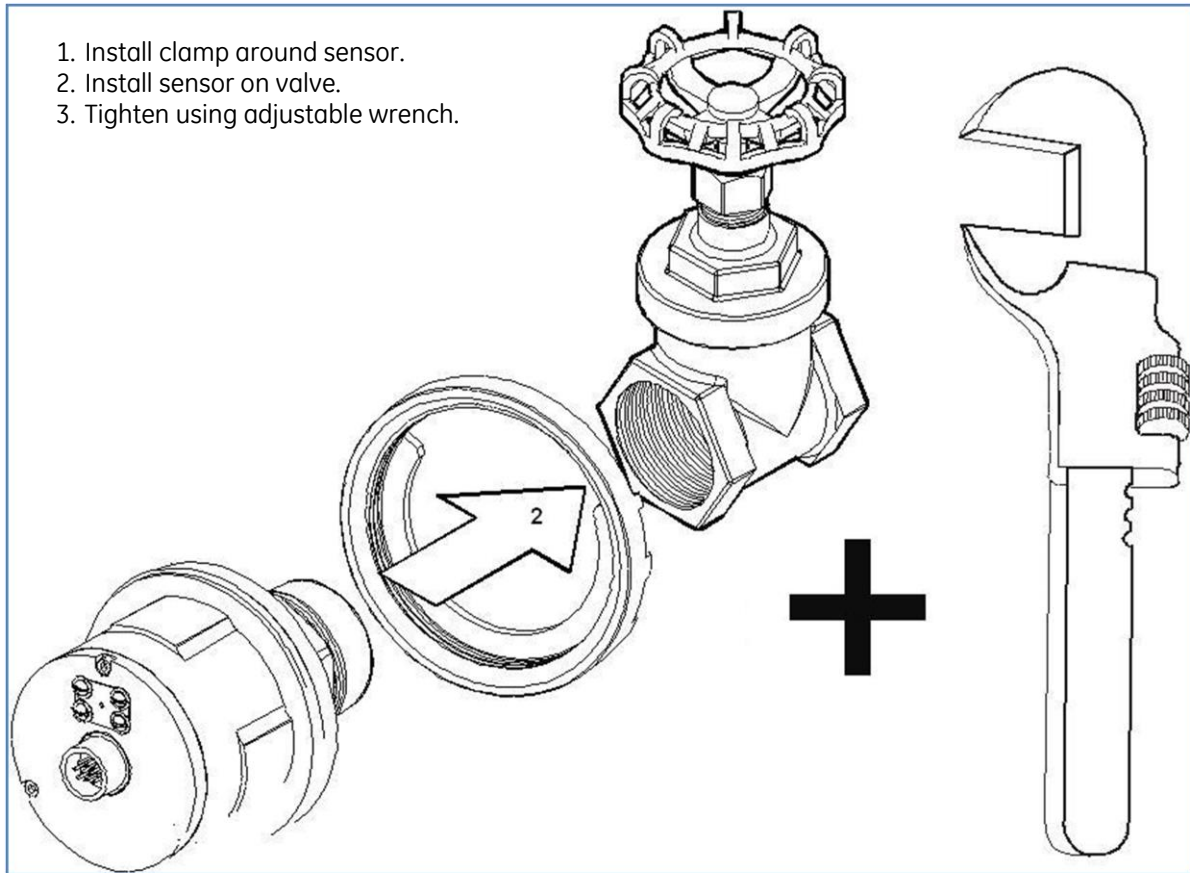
Mount the Sensor Manually onto the Valve and Tighten it, Using an Adjustable Wrench
